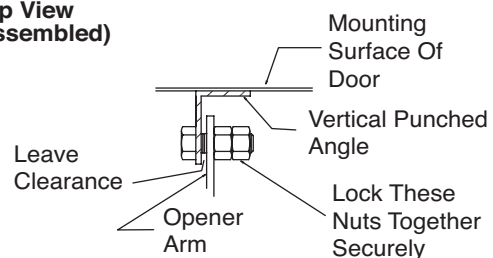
D (Doors with Angle Iron Reinforcement Bracket and Stile in Center of Door)
